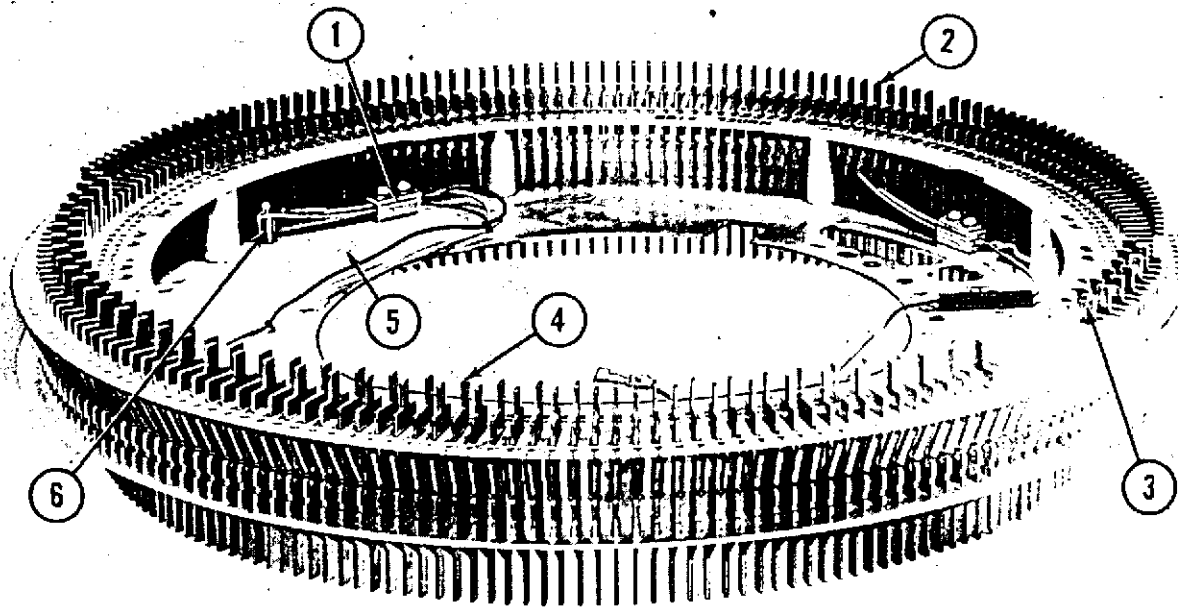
SELECTOR PLATES AND LATCH PIN ASSEMBLY
